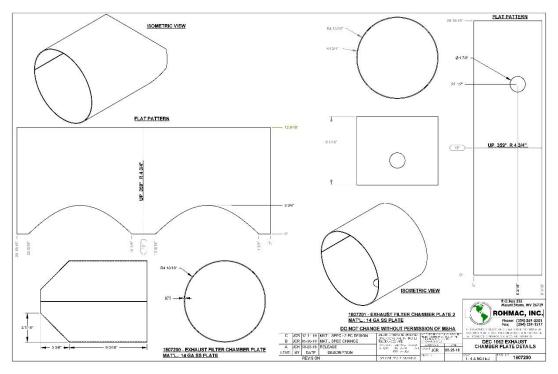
Revised Diesel Power Package Exhaust Chamber Plate Detail Drawing
